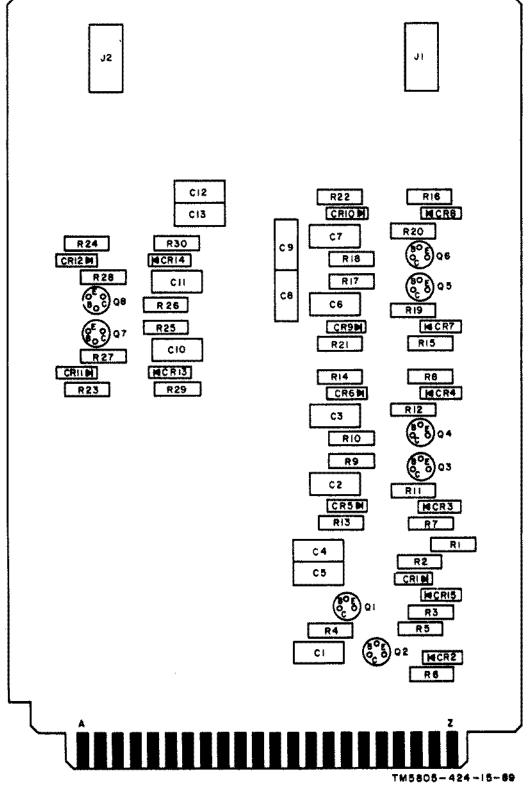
Printed-circuit card assembly A33A2 (PC 80034110), component location diagram.
